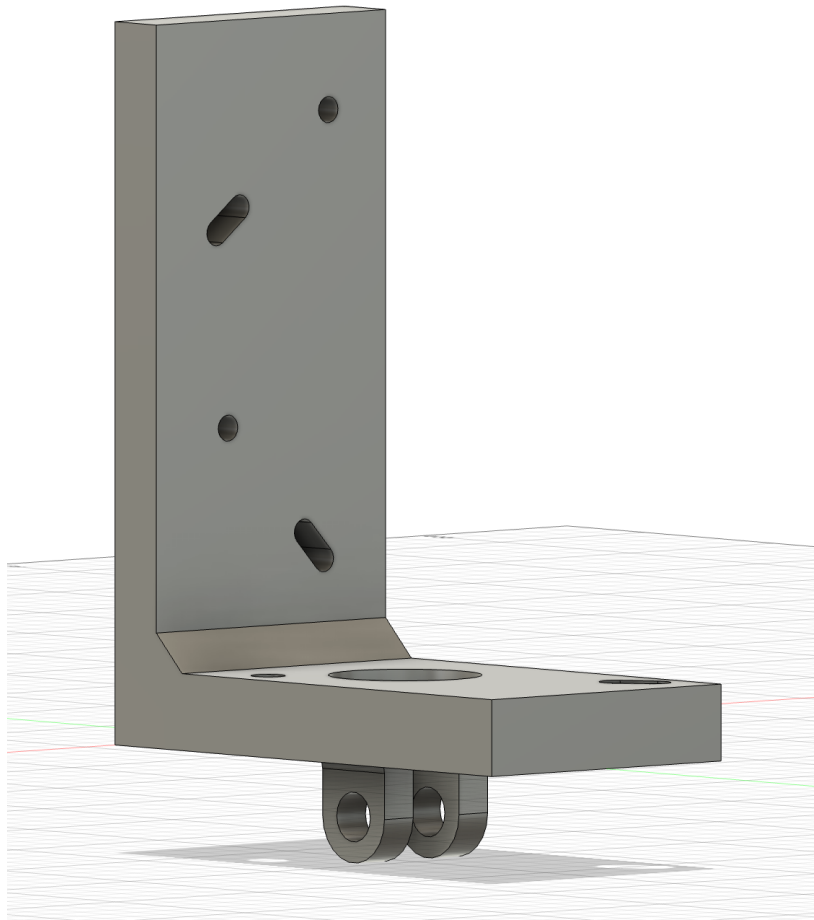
Detailed view of the L-shaped motor connector showing the reinforcement gusset, motor recess, and filleted mounting ears.
